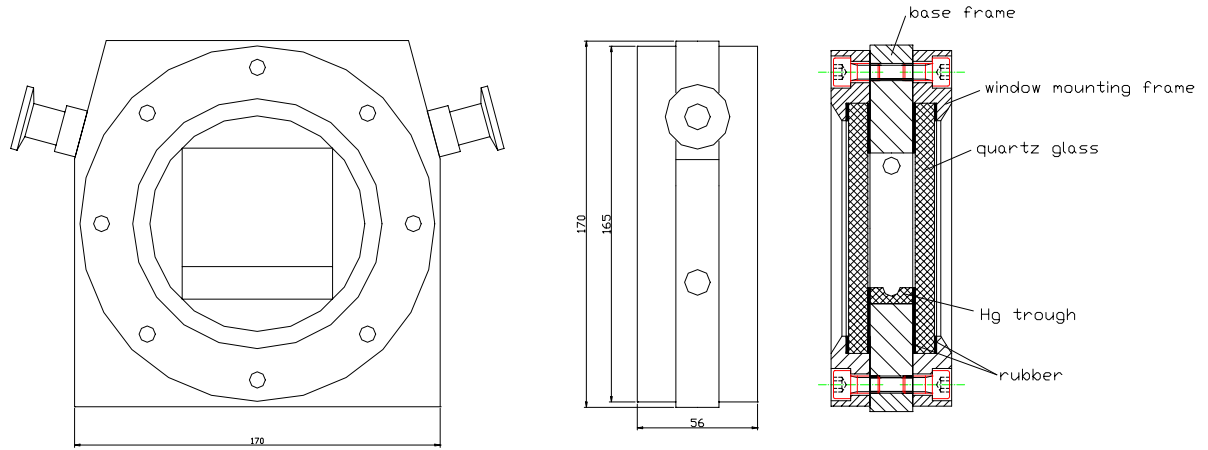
Drawing Experiment Chamber "Hg Trough"
